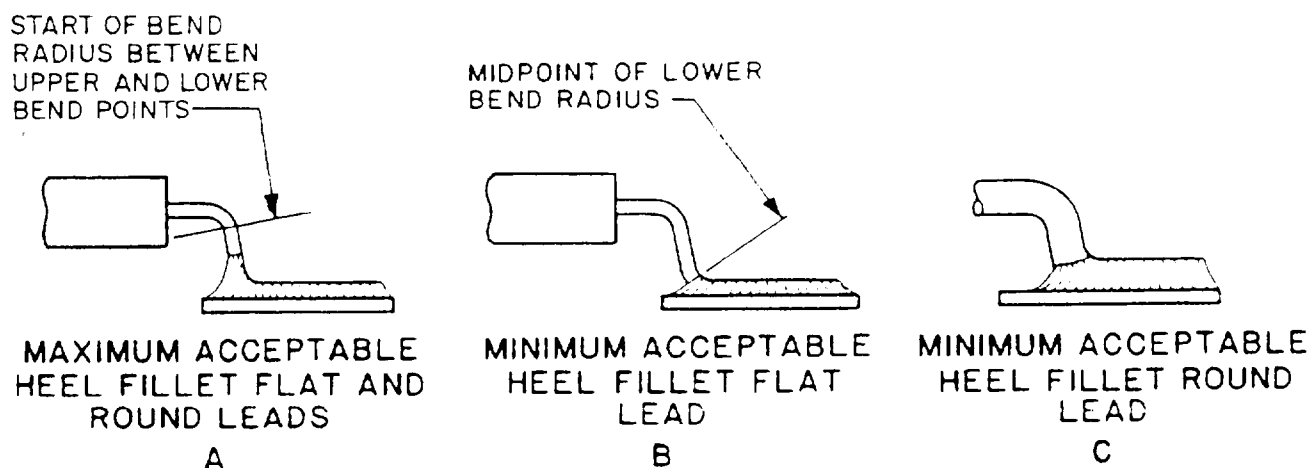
Planar mounted device lead heel fillet (see 4.19.5.5).
